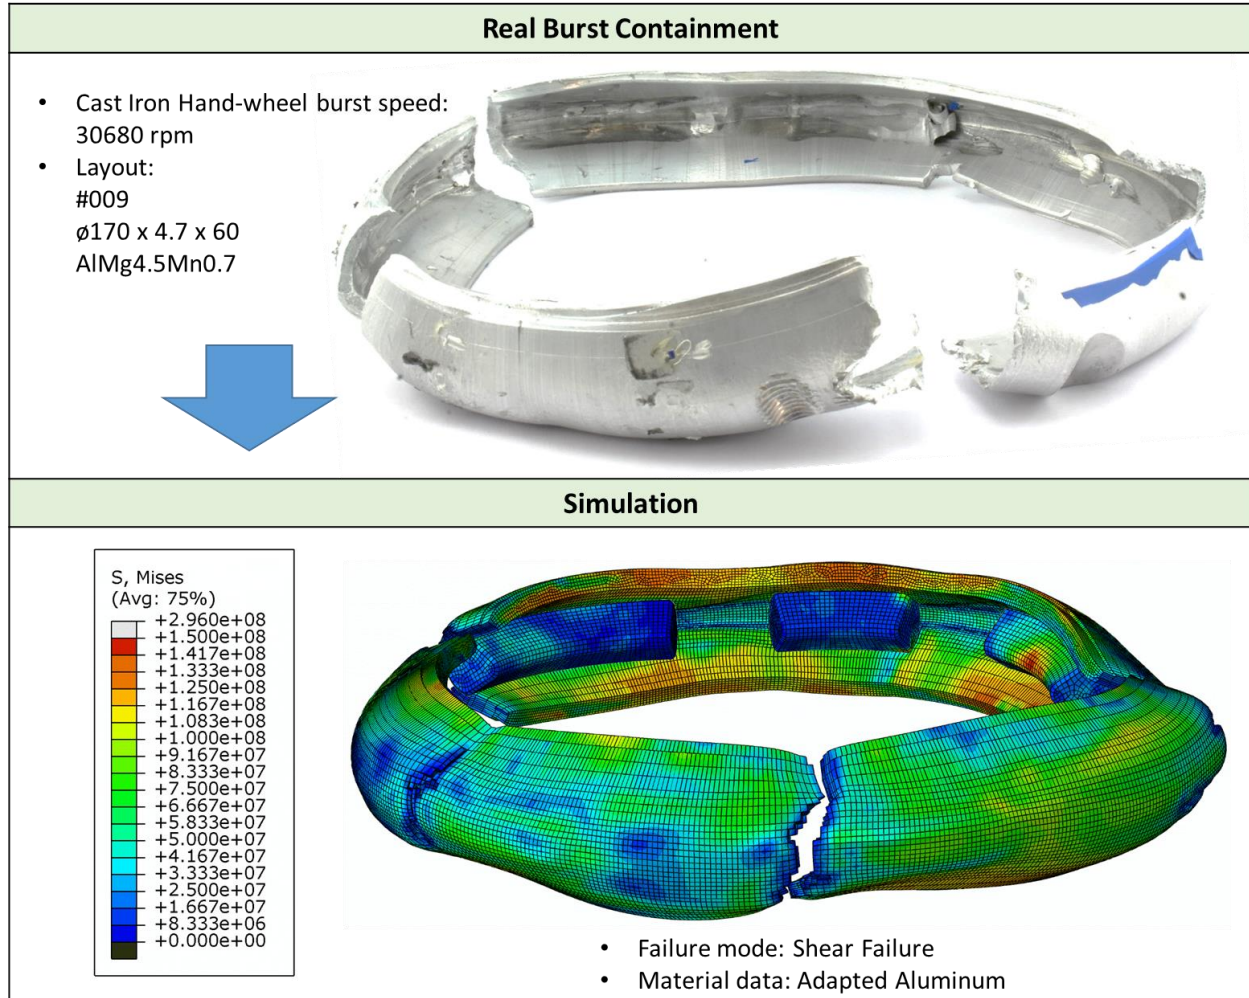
Reconstruction of a completely destroyed containment by implementing a shear failure
